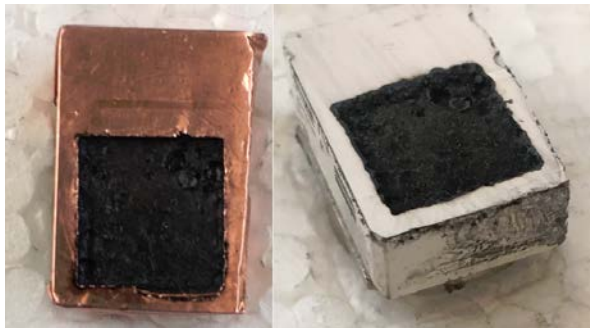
Machined workpiece of ZrO_2 using EDM with self-adhesive copper foil
